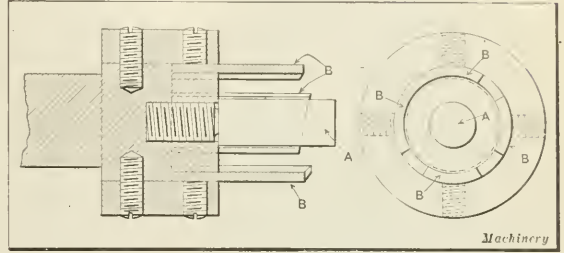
Tool used for boring Arbor Hole in Circular Saw Blades
